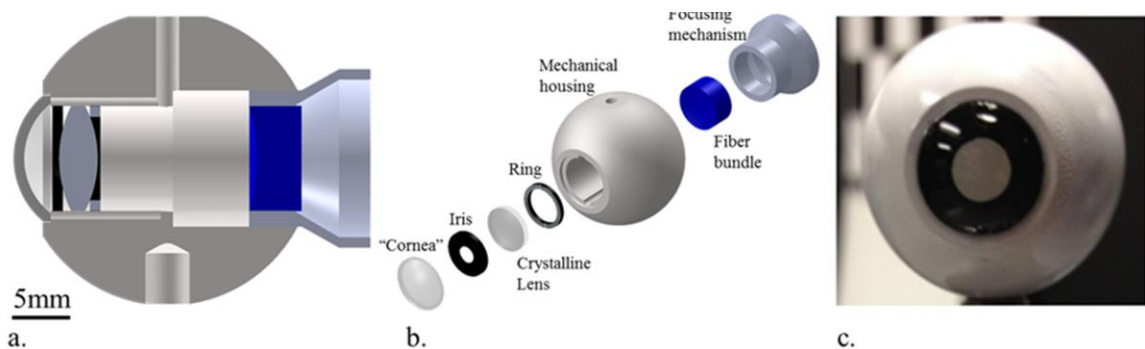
a) Cross-sectional view of optomechanical eye model; b) Exploded view with individual parts listed; c) The assembled optomechanical eye model that is comparable to a life-size human eye.
